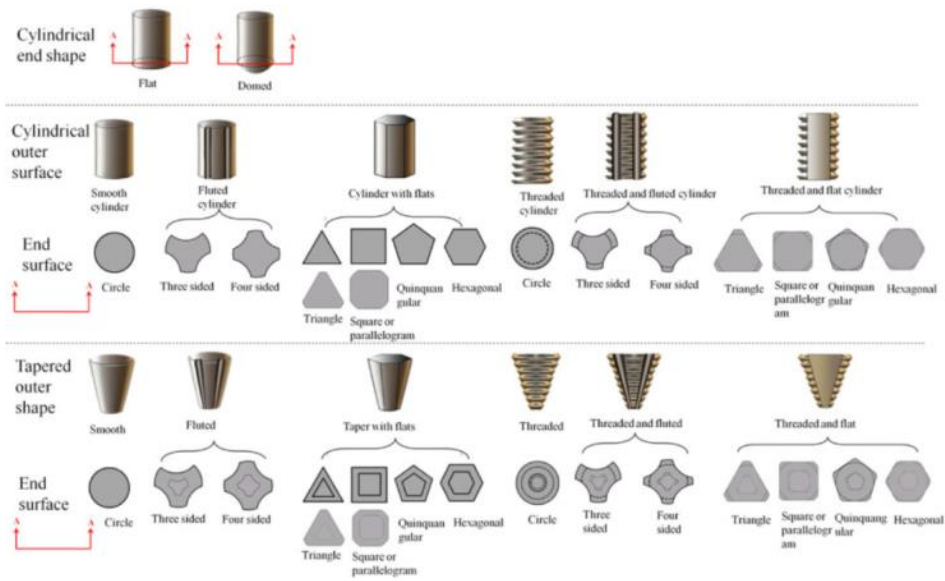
Common Friction Stir Welding Pin Profiles
